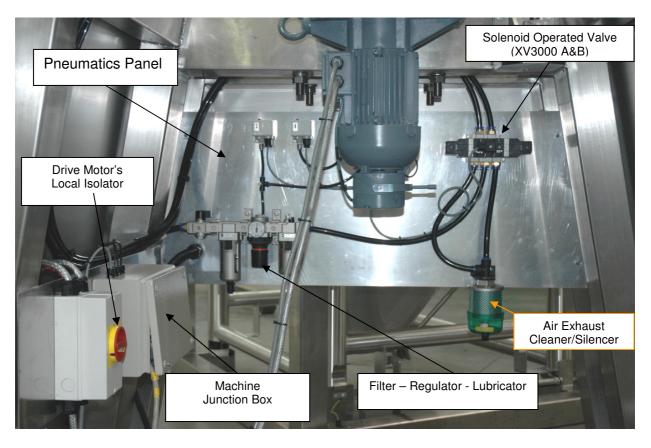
Blender - Drive Motor, Pneumatics' Base Plate Assembly, Machine Junction Box
